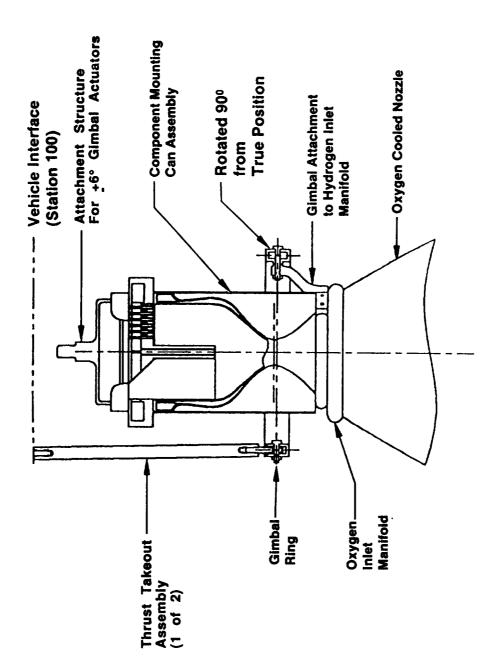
Component Mounting Can Assembly and Gimbal Configuration
